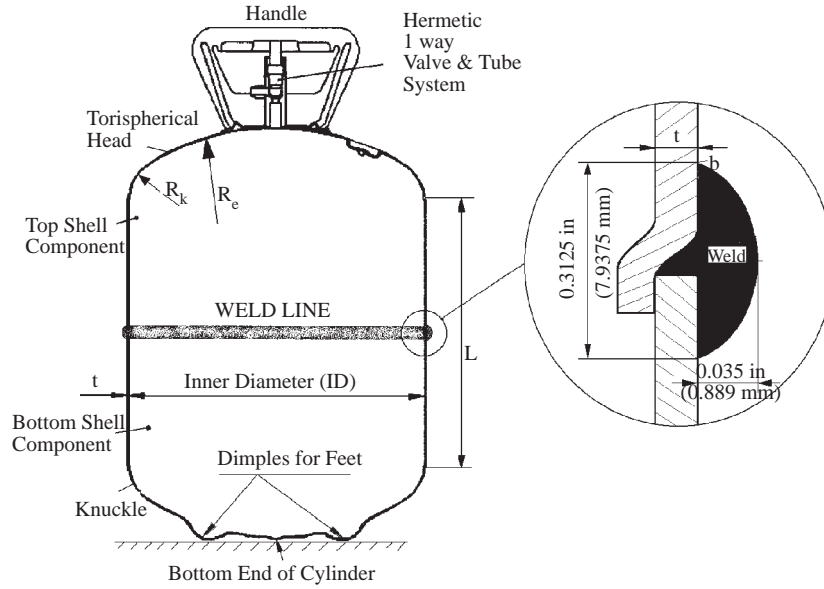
The geometry of the DOT-39 refrigerant cylinder and its weld zone.
